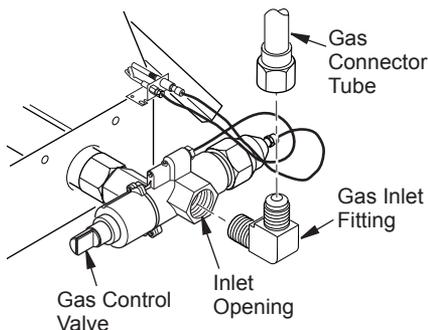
Installing Inlet Fitting and Gas Connector Tube
